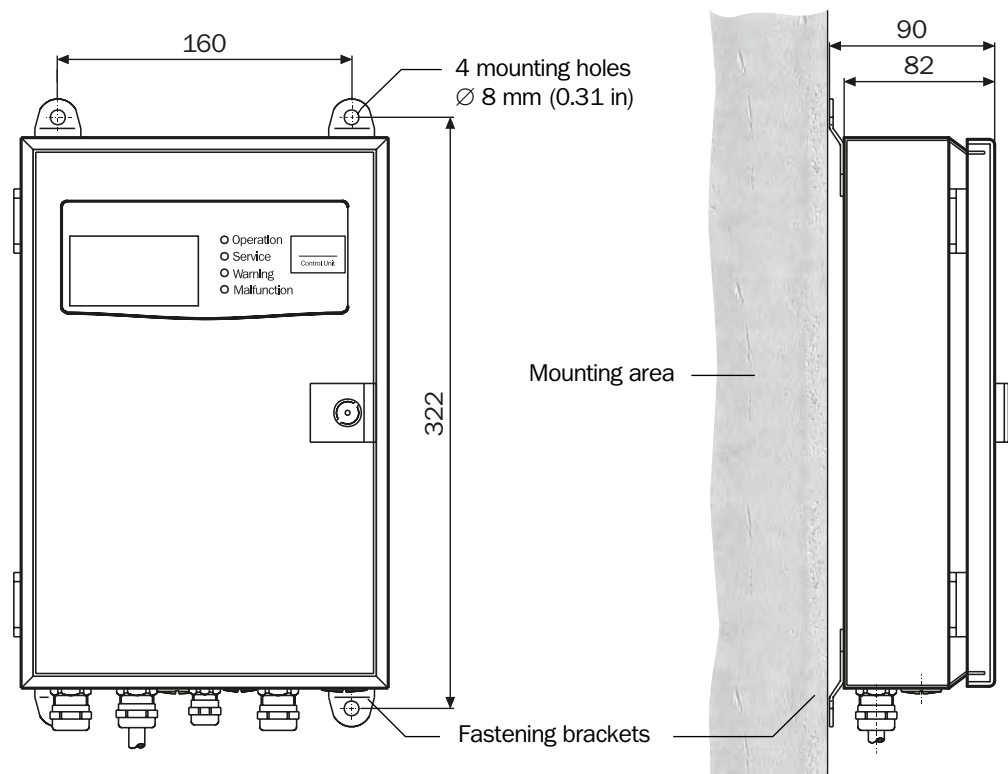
Mounting of the evaluation unit (steelplate housing)
